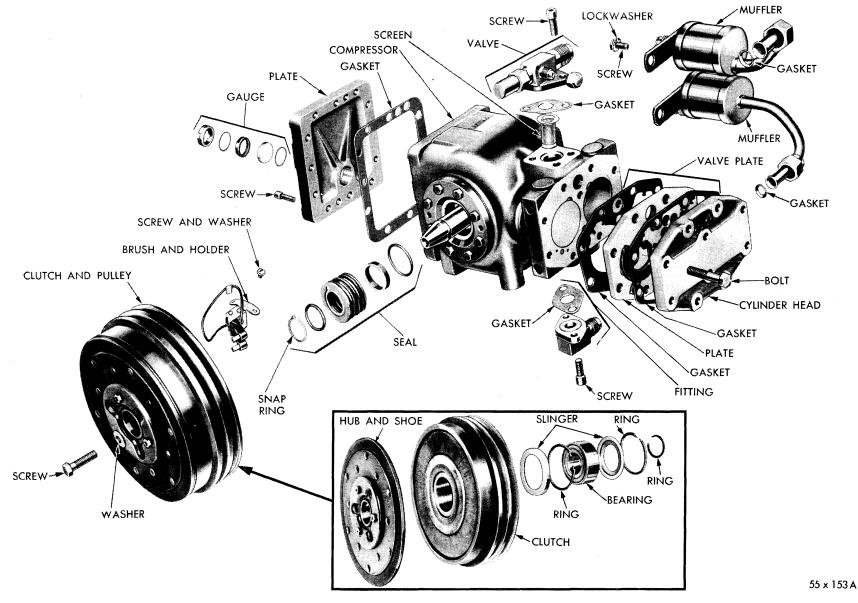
Tecumseh Compressor (External Muffler Type; No mufflers used on integral type) Disconnect discharge tube flared connection at discharge (lower) muffler and cap tube nut and male connector. Remove Allen screws from suction service valve. Remove upper muffler bracket to compressor attaching bolt and carefully lay suction valve, muffler and tube assembly to one side. Do not bend vibration eliminator excessively or it may become damaged. Cover suction port in compressor and suction valve with masking tape. Remove compressor to mounting bracket and support bracket bolts and remove compressor from engine.
